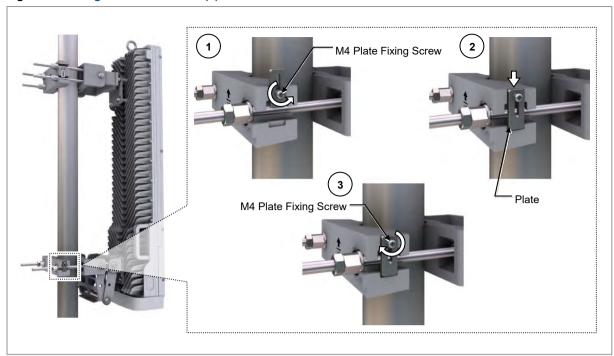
Fixing MMU (Up-Tilting) on the Pole (2)
